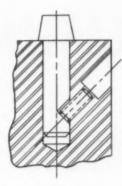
Core made of drill rod and held Fig. 14 Core retained by set screw at an angle. Used when rear of insert is extremely crowded or inaccessible.
